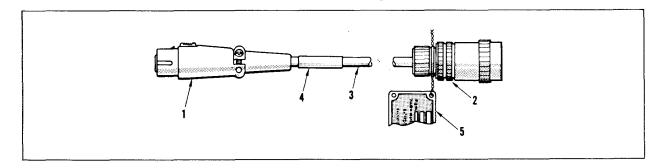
Cable Assembly, Part No. 49657, Location of Parts
